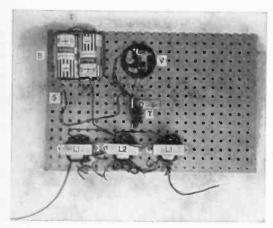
Follow the parts placement indicated in the photograph above. Switch is a Mueller Minigator clip.
